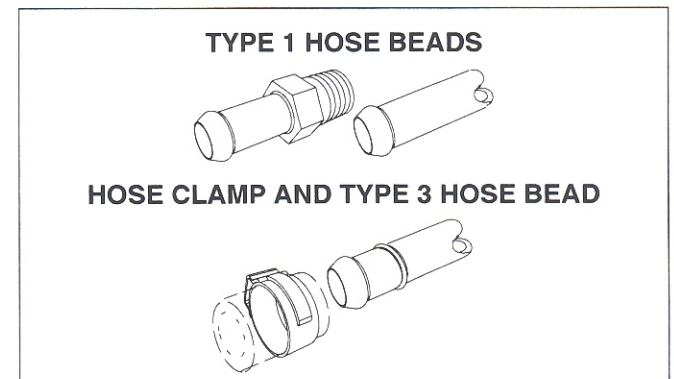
DOUBLE-FLARE SAE J1231 HOSE BEADS AND STEPLESS EAR CLAMP
